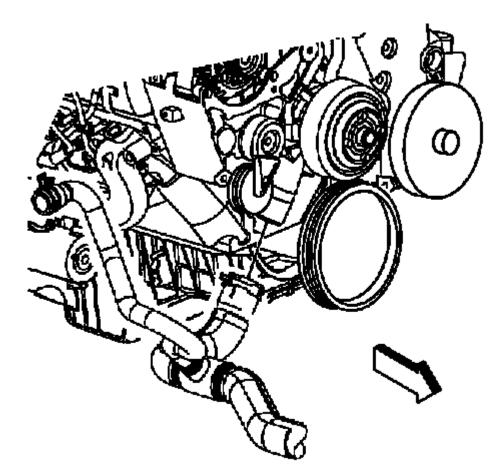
Installing Radiator Outlet Hose Courtesy of GENERAL MOTORS CORP.
